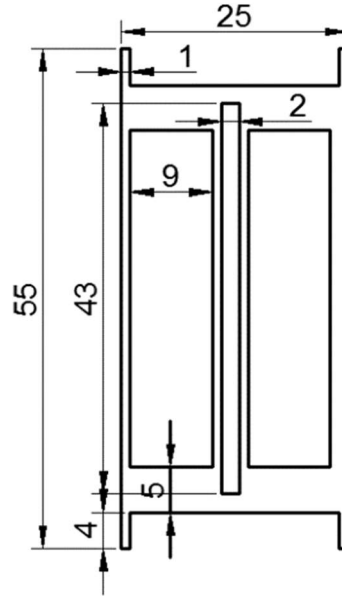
8 Modified dimensions of 3D filter 1.0 supporting frames.
